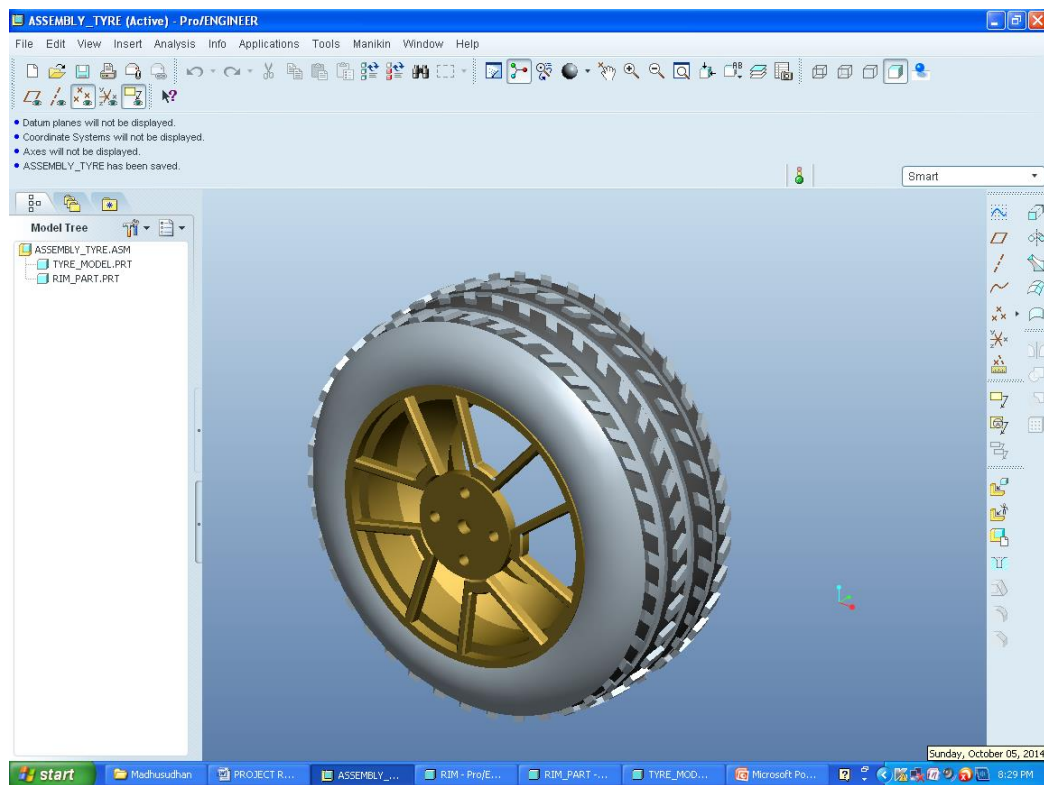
Pro-E Model of Skoda Car Tyre Assembly
